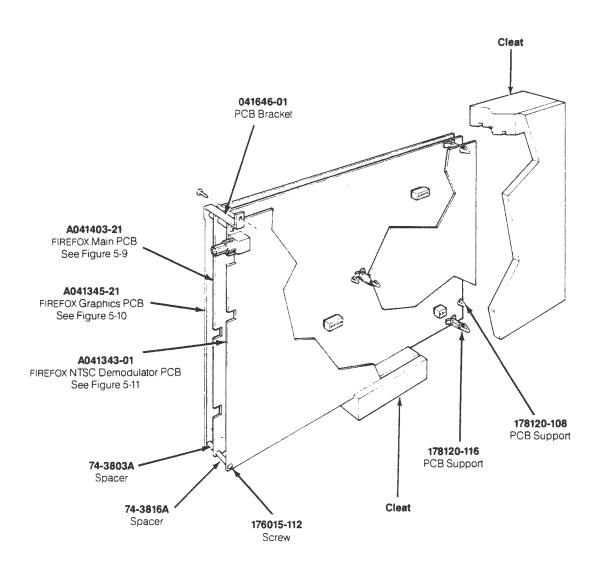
PCB Mounting Hardware—Ireland Parts List
